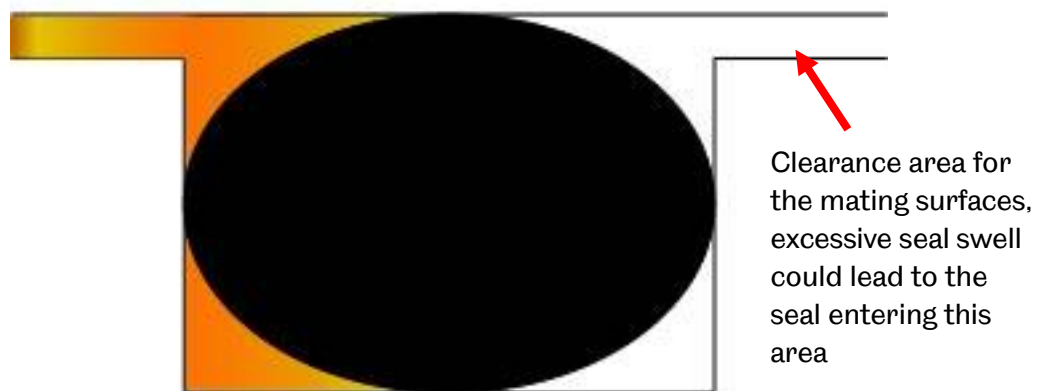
, A Cross Sectional View of an O-ring Oil Seal in Compression
